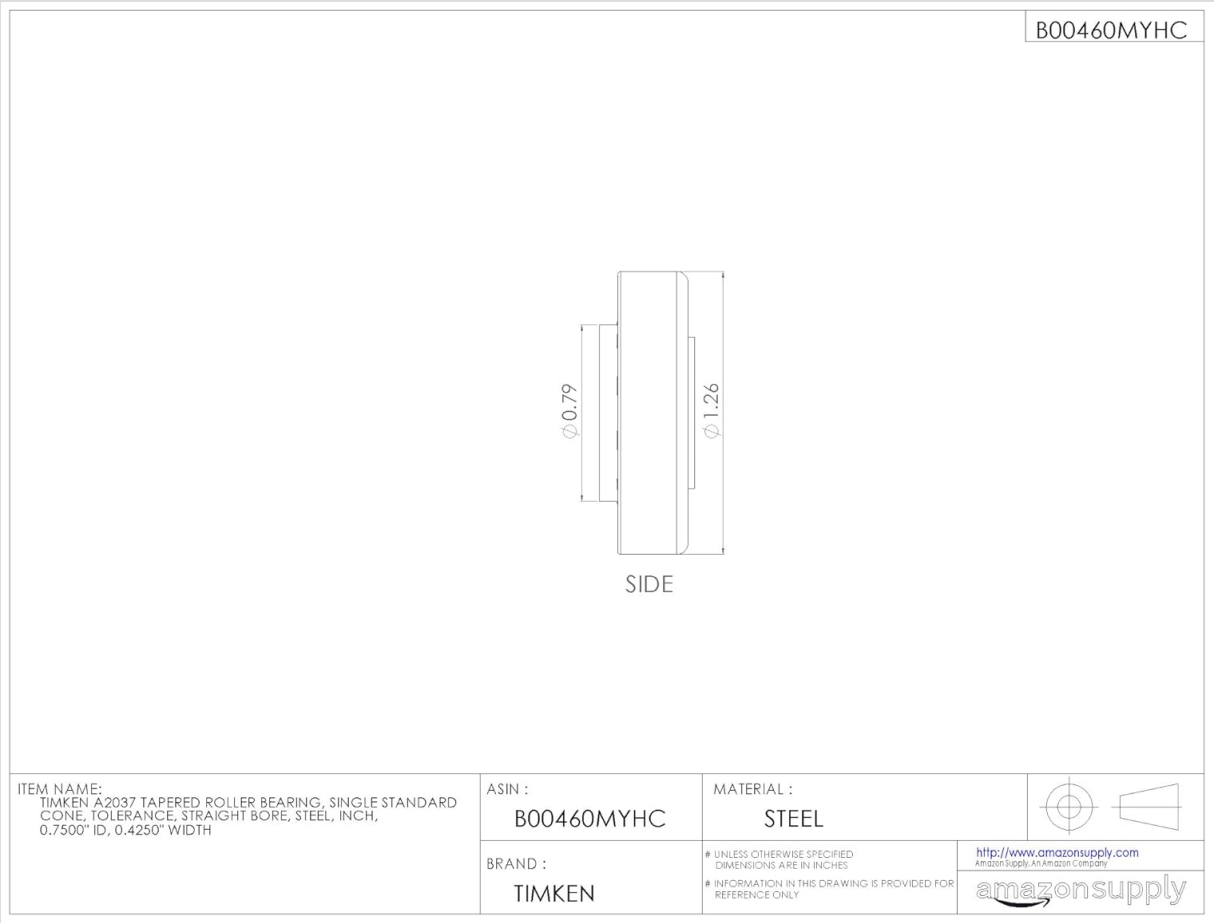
Side view technical drawing of the Timken A2037 Tapered Roller Bearing Cone, illustrating its profile and width.
